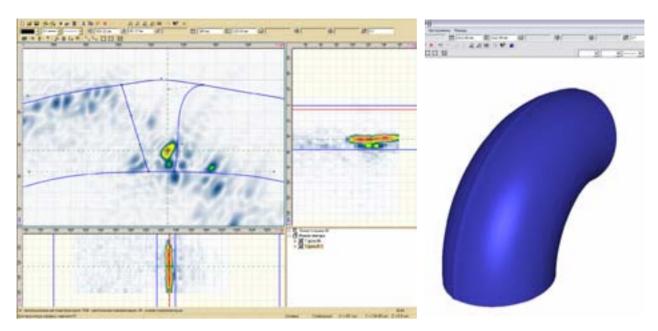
Building the chamfer scratch of longitudinal welded joint of pipe Du500 elbow. The side drilled holes in the adjustment sample image is resulted, three-dimensional image of pipe elbow (a), the scratch constructed in program (b).
